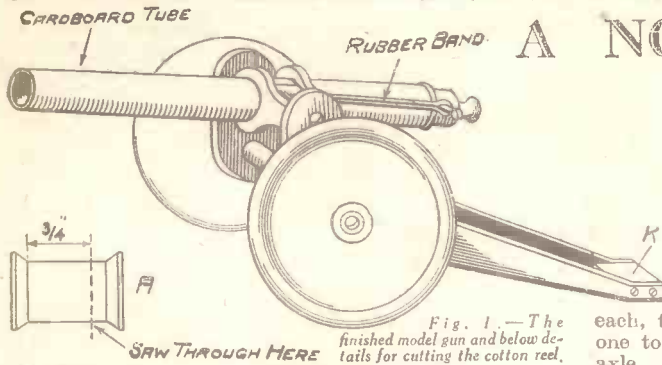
The finished model gun and below details for cutting the cotton reel.
